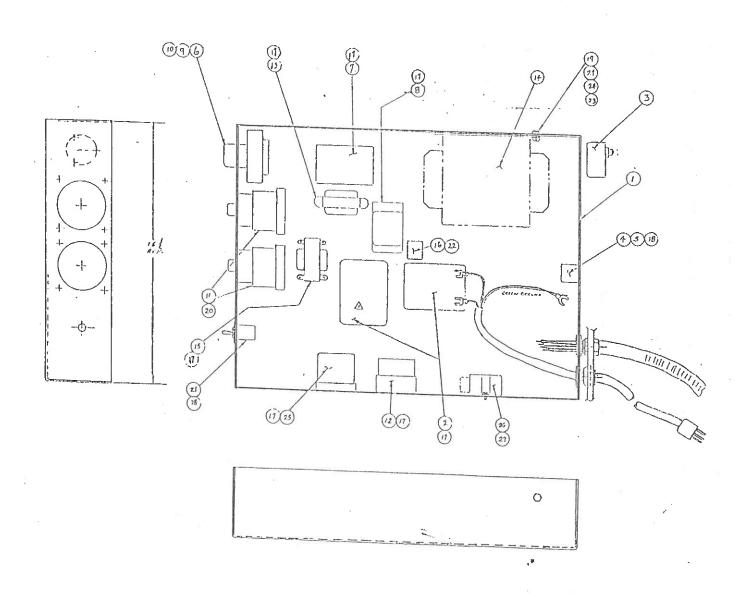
A Parts Location, Electrical Chassis Model 6400A Series
